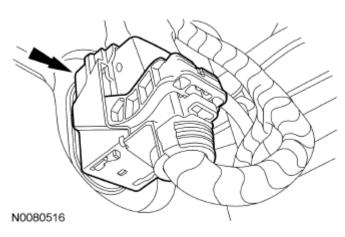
Locating Transaxle Electrical Connector Courtesy of FORD MOTOR CO.
